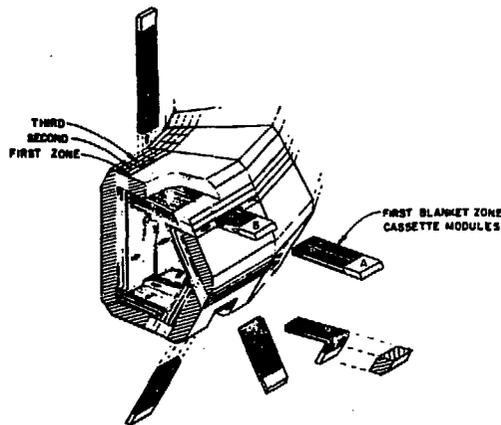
Cassette module subassemblies. The zoning approach to blanket design using replaceable cassettes. This figure illustrates the removal of cassettes in the first zone damaged by radiation. With this arrangement, there would be a five-step sequence to remove the middle cassettes (A) of the first zone, and the outer cassettes (B) would then be removed to the free space and the sequence repeated.
